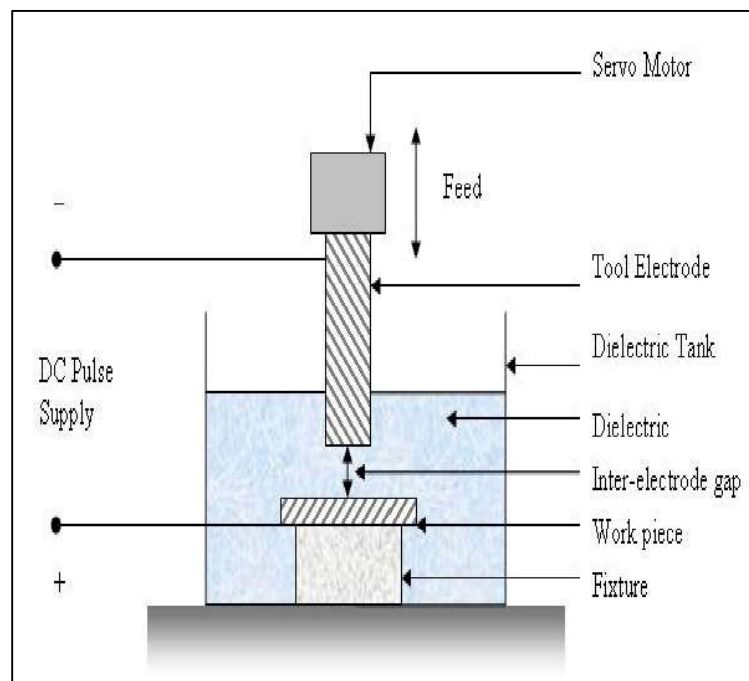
Schematic diagram of electrical discharge machining process [12]
